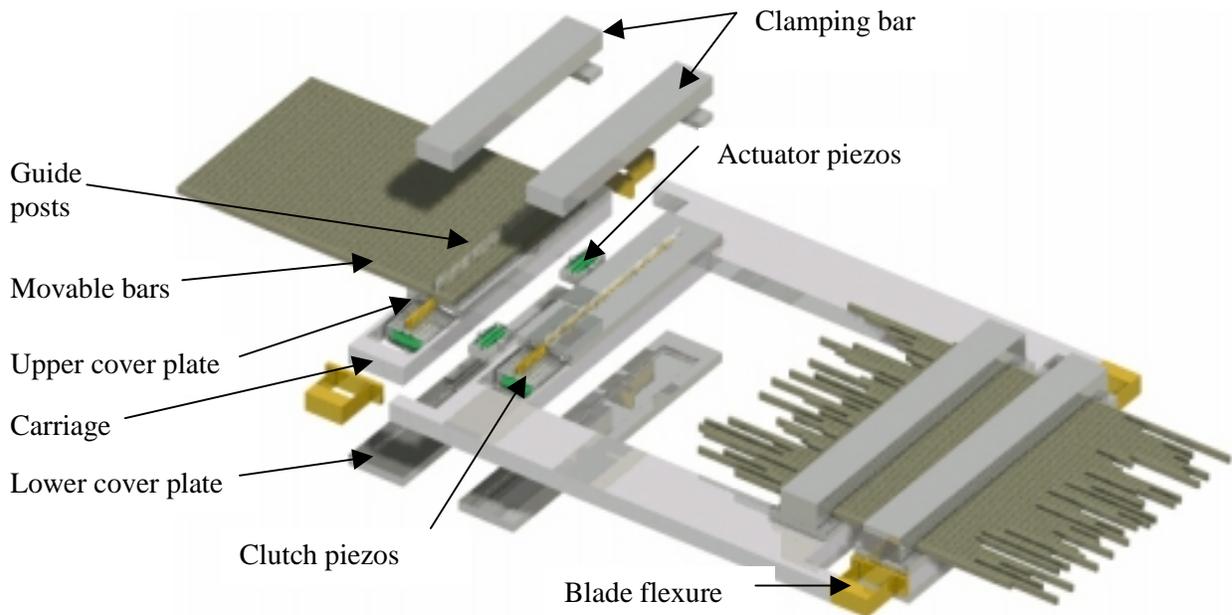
An exploded view of the conceptual fibre optic manipulator.
